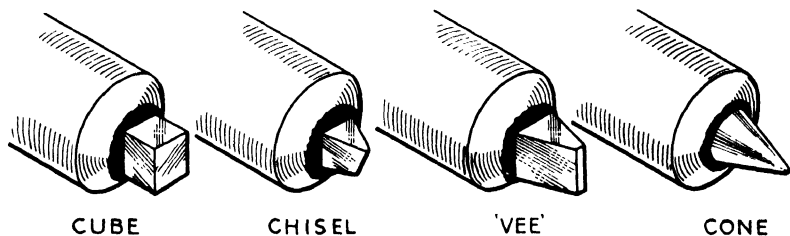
FORMED DIAMOND TOOLS FOR FORM DRESSING
